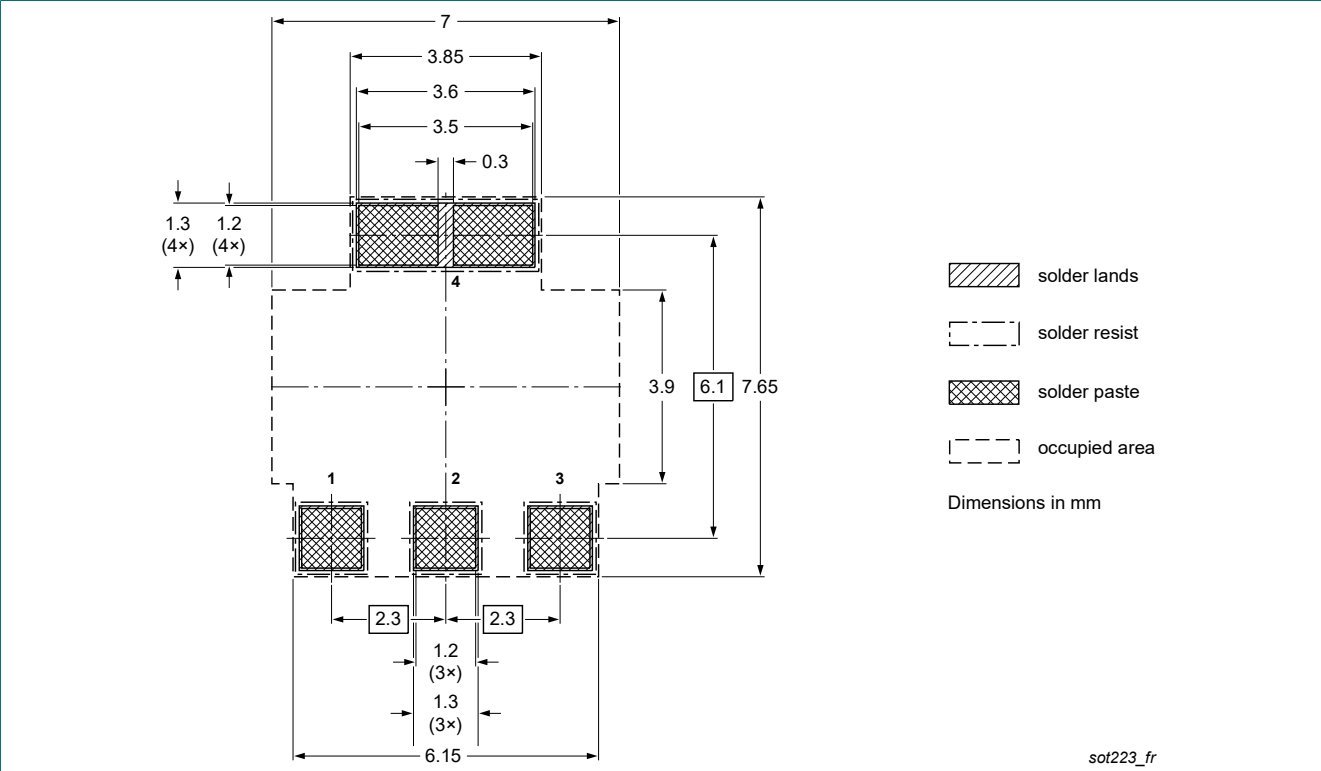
Reflow soldering footprint for SC-73 (SOT223)
